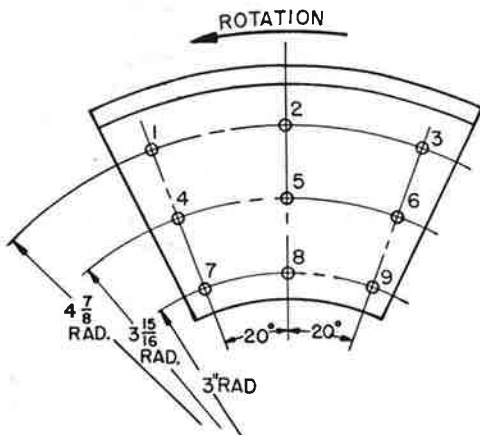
Thermocouple locations on the 267-mm (10½-in.) bearing
